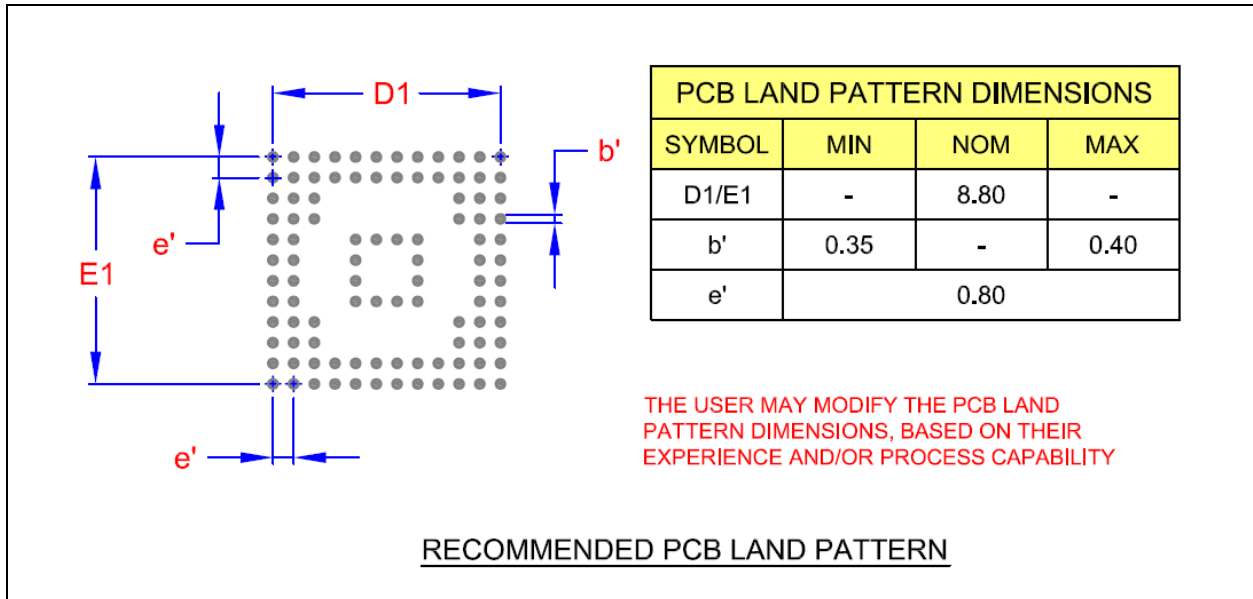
100 Ball LFBGA Recommended PCB Land Pattern
